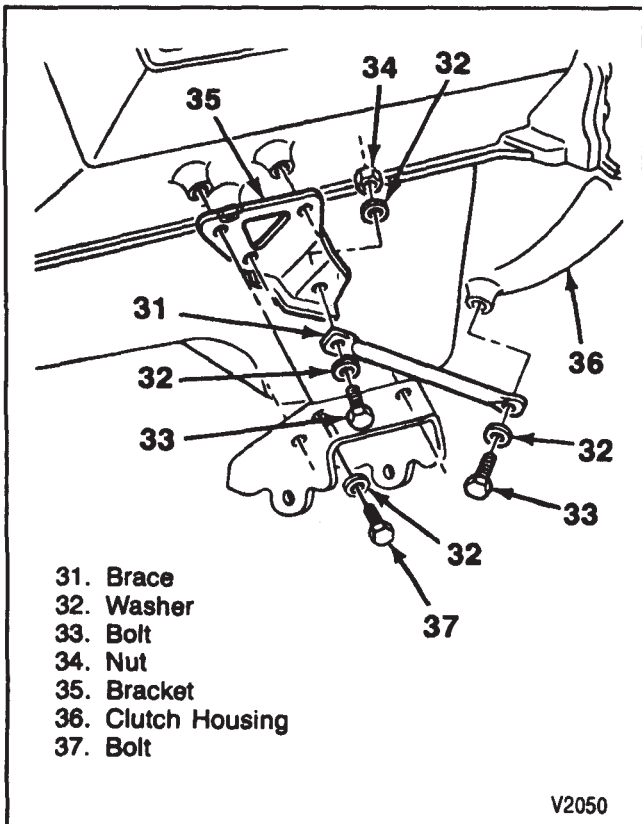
Brace Removal—4.3L (VIN Z and W) Engine
